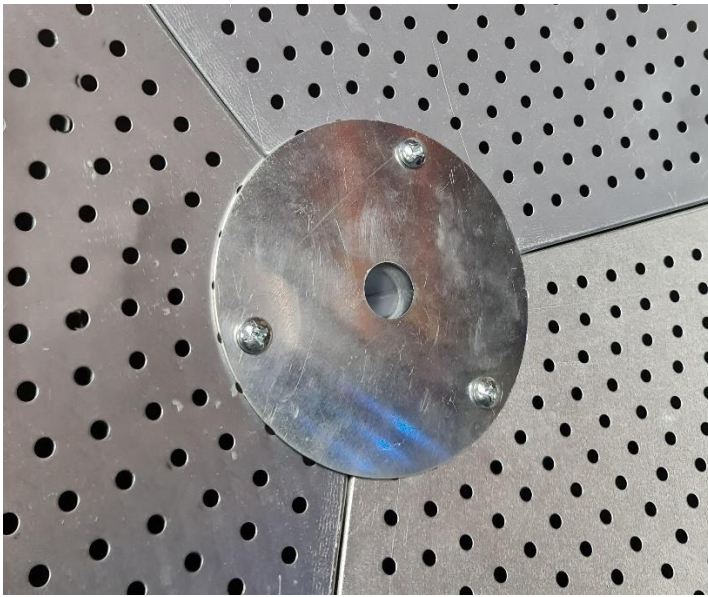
Front Plate Mounting / Frontplattenmontage / Montage de la plaque avant / Montař plyty przedniej / Montaggio della piastra frontale / Montaje de la placa frontal / Voorplaatmontage / Montering av frontplatta / Монтаж на преднама плоча / Előlapí lemez rögzítése / Montagem da placa frontal / Montare placă frontală / フロントプレートの取り付け / 前板安装
